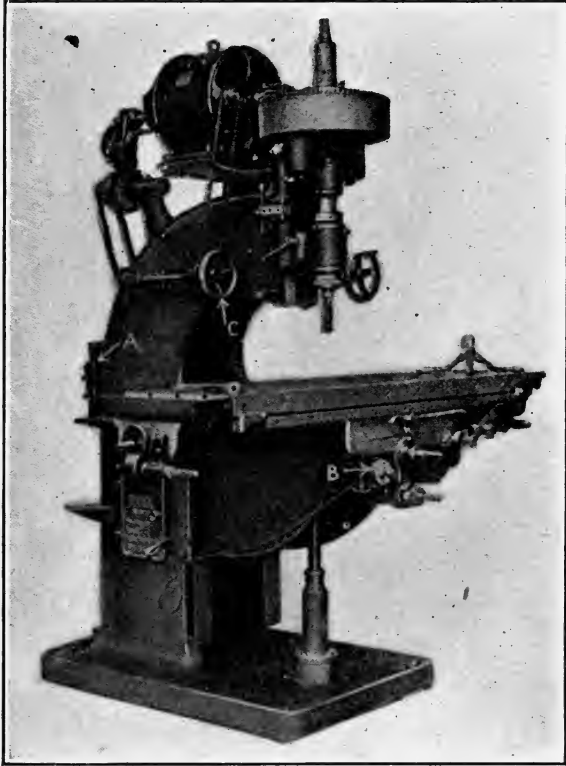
Motor-operated milling machine. Reliance Electric & Engineering Co.
